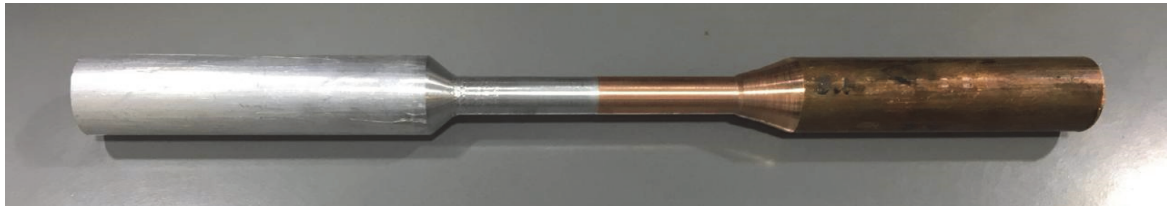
AA6063 and Copper welded specimen prepared for Tensile test.
